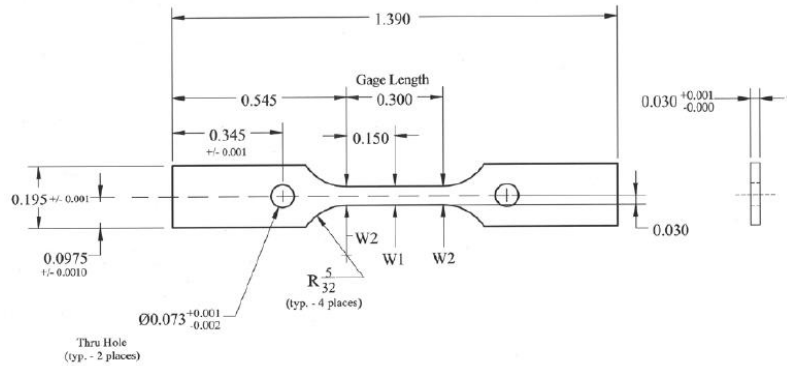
A schematic drawing of subsized sheet-type tensile specimens with extended grip sections for microstructural analysis (unit: inch).
